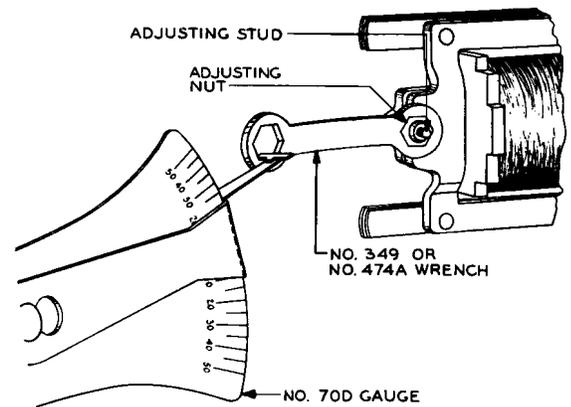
Method of Checking for Adjusting Nut Tightness
